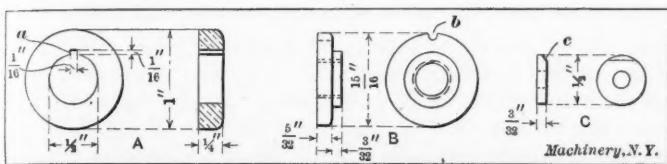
Pieces which were successfully shaved in a Brown & Sharpe Automatic Screw Machine
